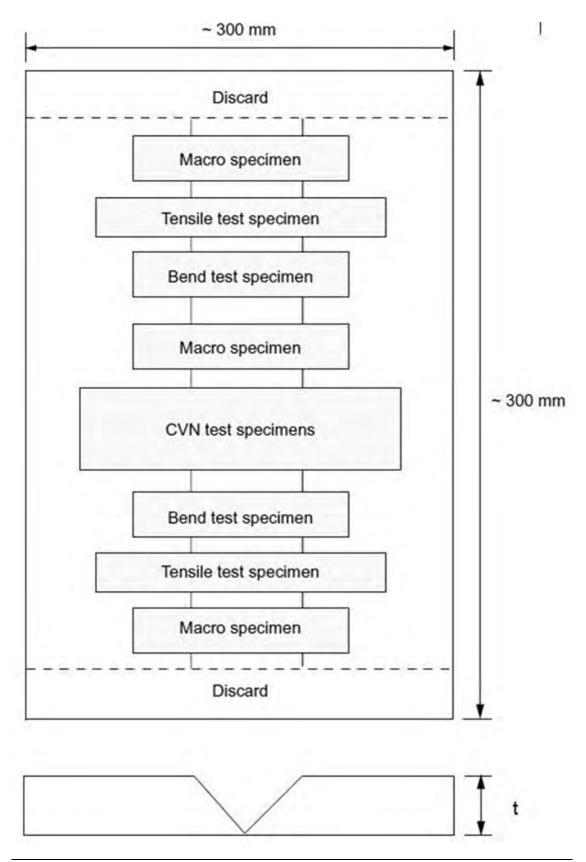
Test Sample for Butt Welding Test (mm)
